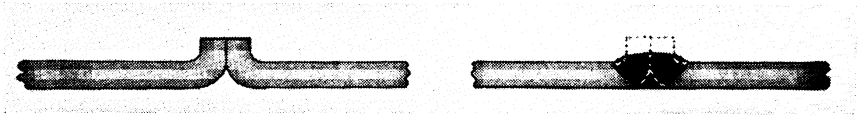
Flange weld for thin sheet metal.
